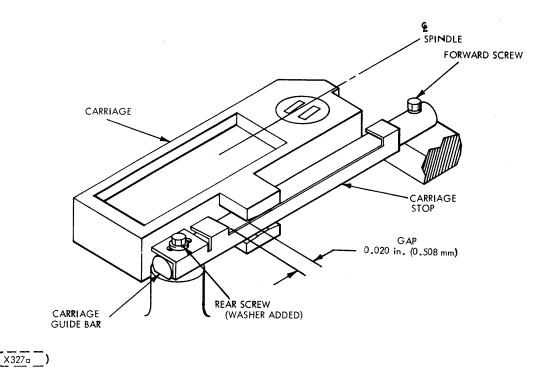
CARRIAGE-STOP ADJUSTMENT
